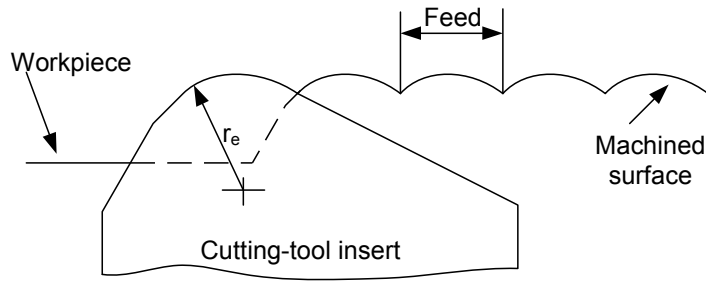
Surface roughness produced by a single-point cutting-tool geometry with a rounded corner.
